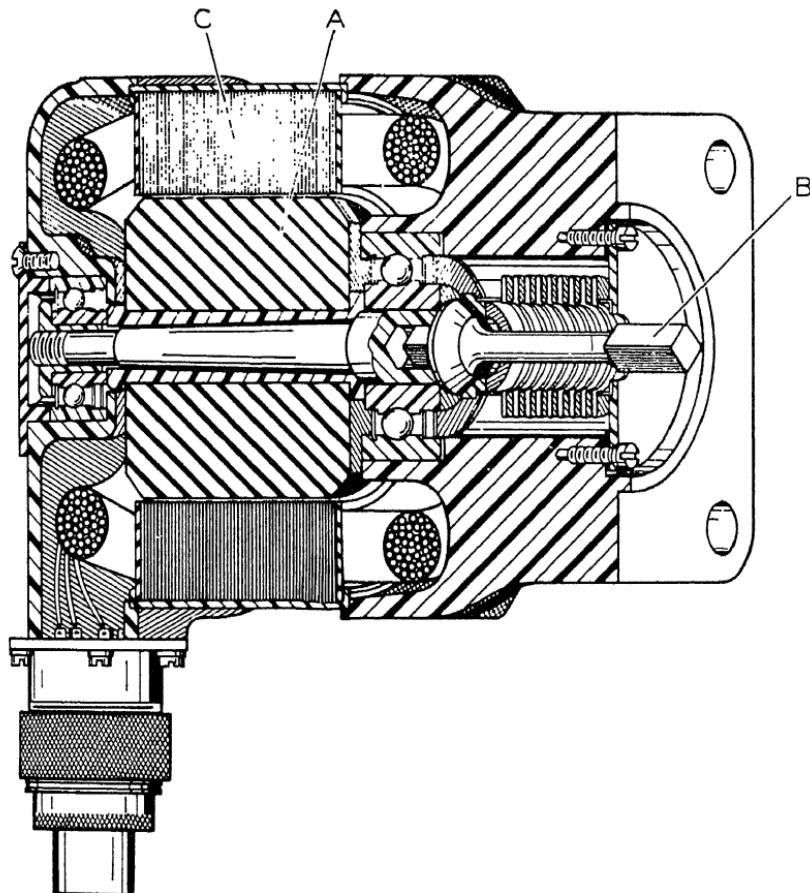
Schematic Drawing Kollsman Tachometer Generator
